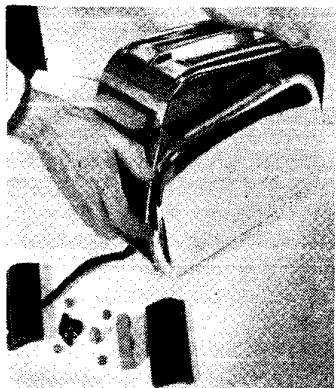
After removal of operating handle, control knob and base mouldings, centre arch of body can be lifted off as shown
